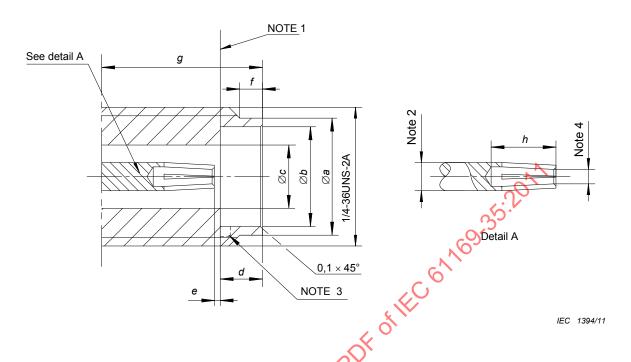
Connector with socket-centre contact (for dimensions and notes, see Table 2)
